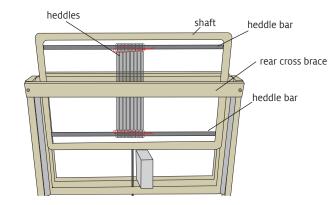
B - INSTALL HEDDLE BARS IN SHAFTS
